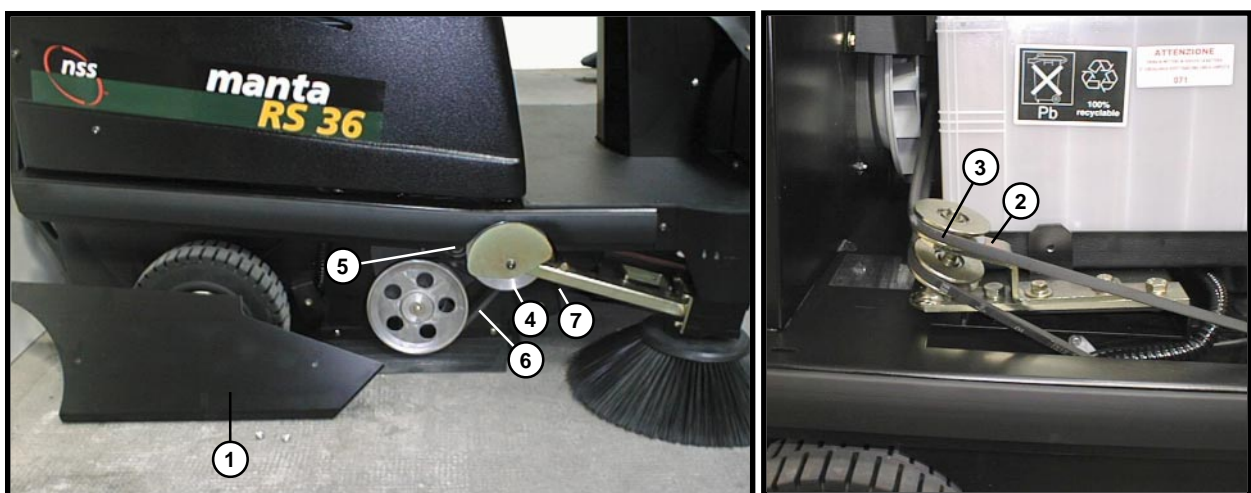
FITTING THE RIGHT SIDE BRUSH SECONDARY DRIVE BELT
